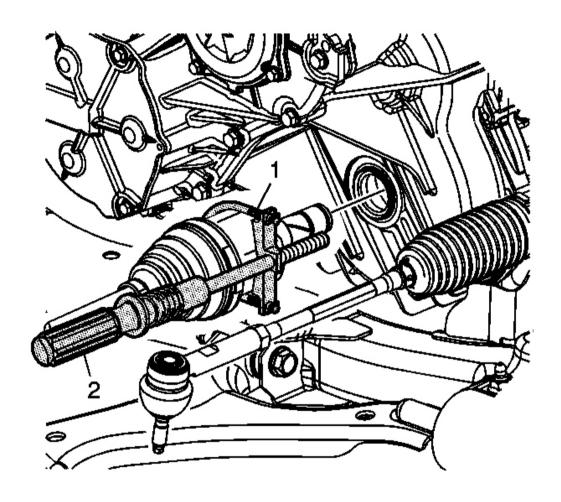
Left Drive Axle, J 45341 & SA9173G Courtesy of GENERAL MOTORS CORP.
